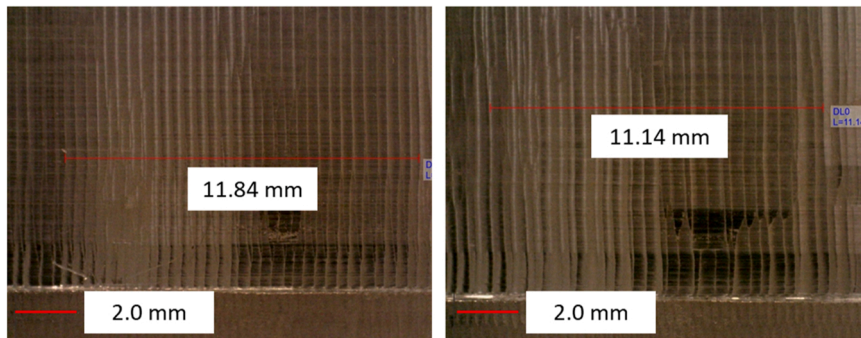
Machined surfaces from spindle-robot SLE tests for (a) x direction face of square; and (b) y direction face.
